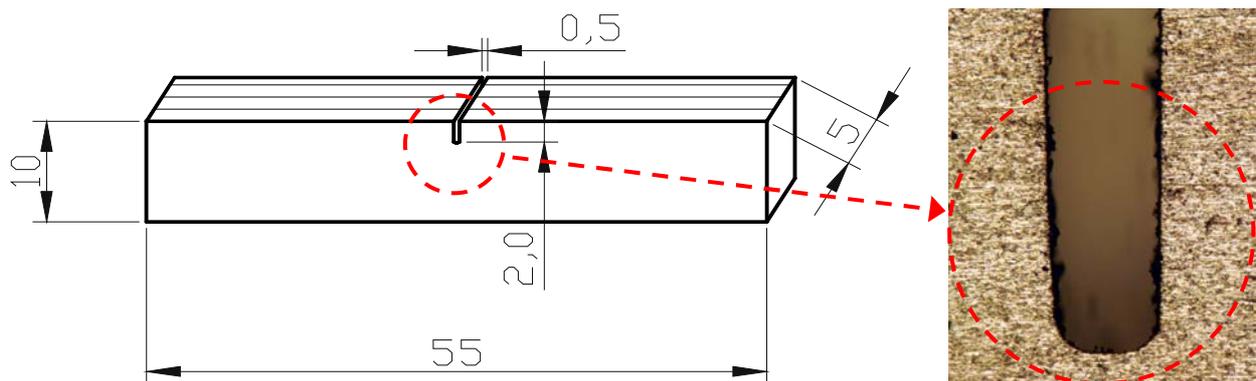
Charpy impact specimen geometry according to the ASTM D5045 standard [15] (sizes in mm). The approximately 0.25 mm root radius of a notch in a TiGr specimen is shown in detail.
